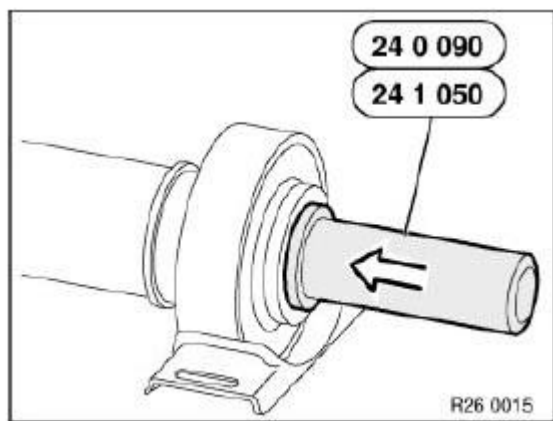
Identifying Special Tool (24 0 090, 24 1 050) On Center Bearing Installation Positions
